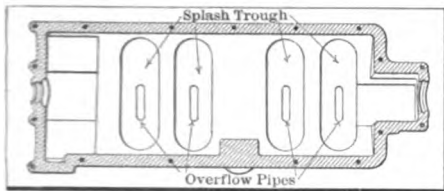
Oil pan casting of Marion "40," showing overflow standpipes and oil troughs
